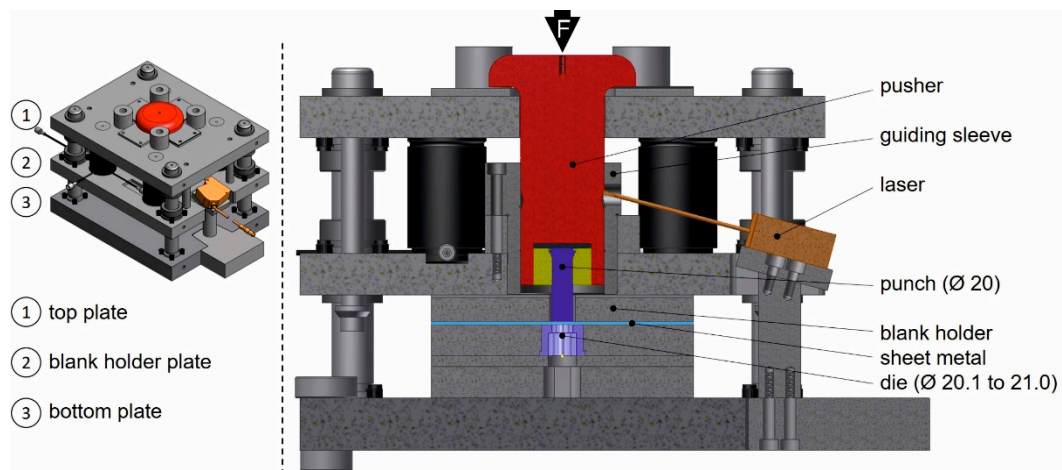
Setup of the tool used for adiabatic blanking. The force is applied to the pusher via a striker unit of the ADIAflex[®] machine.
